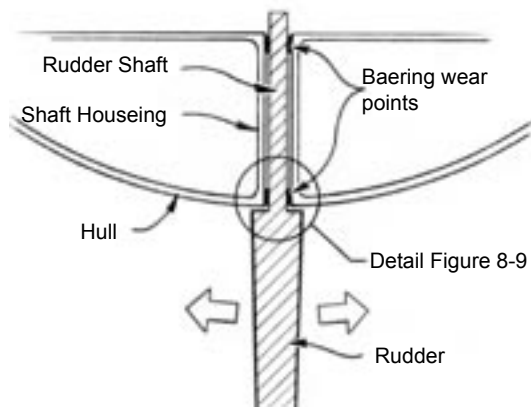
Most stock rudders simply bear on the inside of a fiberglass housing and the high loads exerted by the rudder eventually wear the bearing surfaces.
